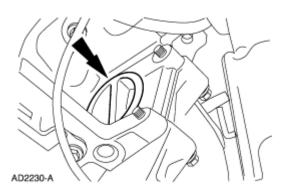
Locating Rubber Access Plug Courtesy of FORD MOTOR CO.
